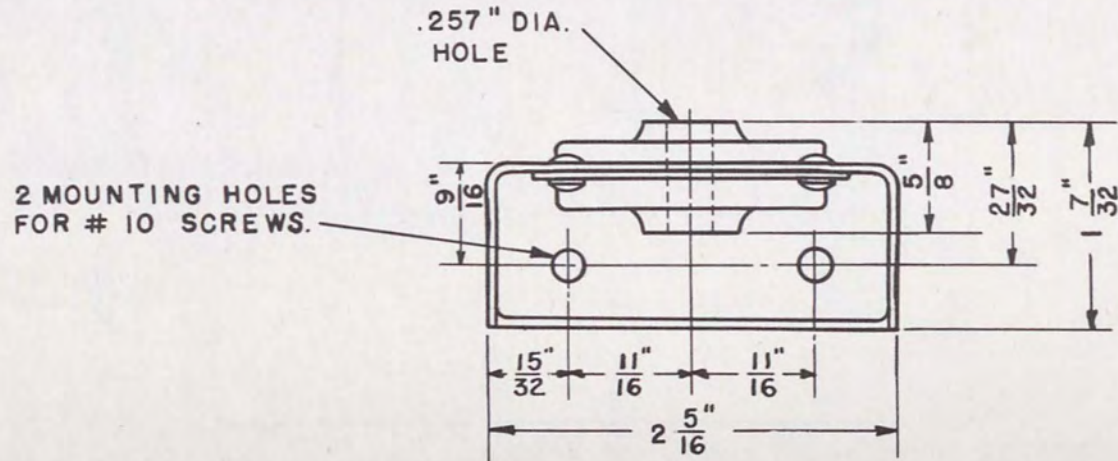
MOUNTING FT-115-B, OUTLINE DIMENSIONAL SKETCH
